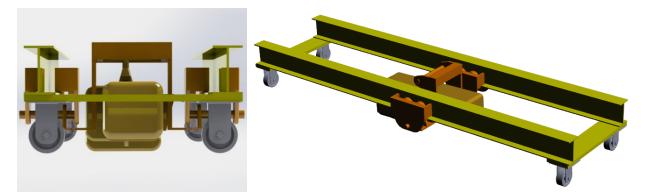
(a) Front view of the CAD drawing (left), (b) dynamic perspective showing the components of the trolley system (right).
